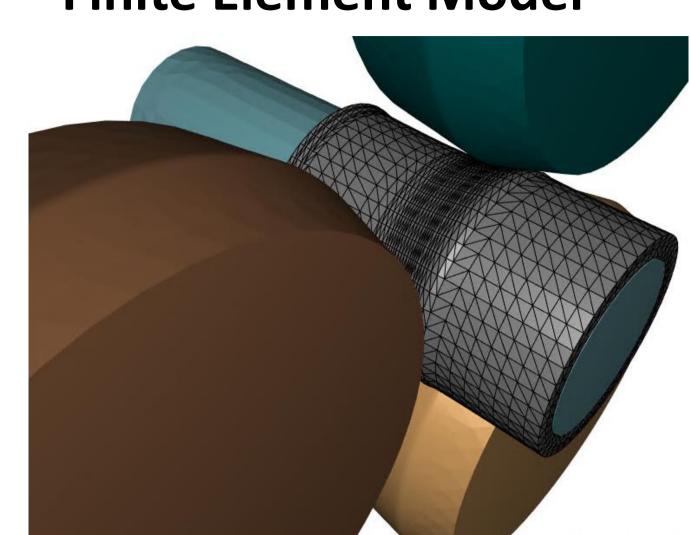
Mesh demonstration of the workpiece, roller, and mandrel
